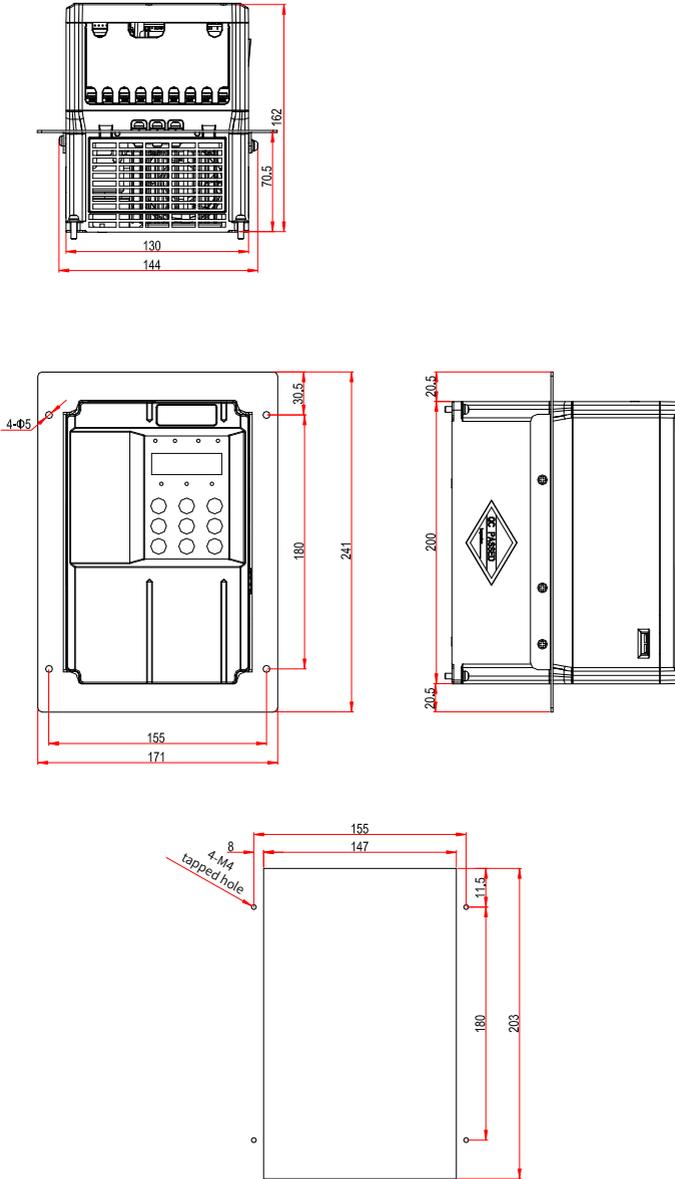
Intermediate mounting bracket dimensions and hole spacing for 3.7-5.5 kW AC drive models
